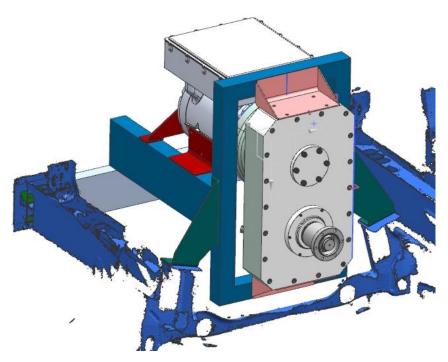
Rear 3D view of the powertrain sub frame with the motor and gearbox assembled. In dark green the rear connection with the chassis of the vehicle
